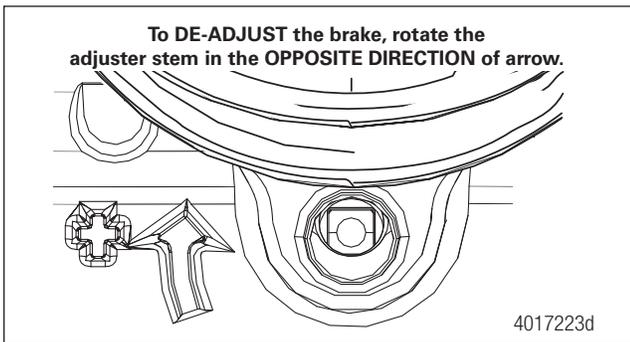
Adjustment Arrow Cast into the Caliper Housing (LH)
